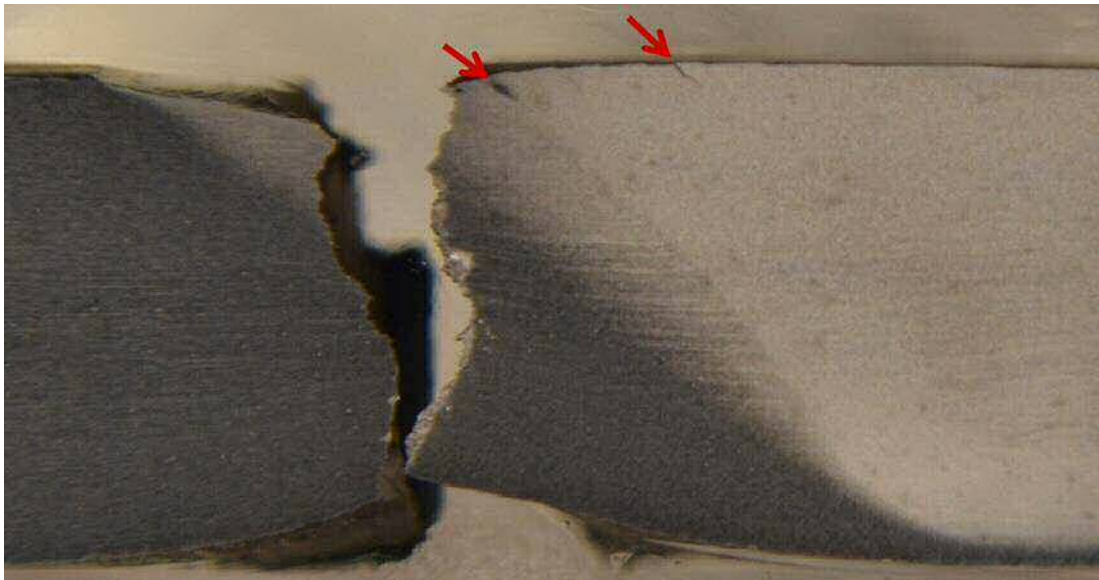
Macrograph of slow weld sample's fracture path (side view) [Etched]
